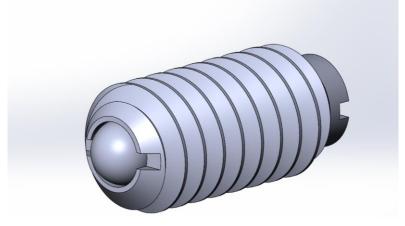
Spring Plunger Pin for Ratchet on Button Maker Die
